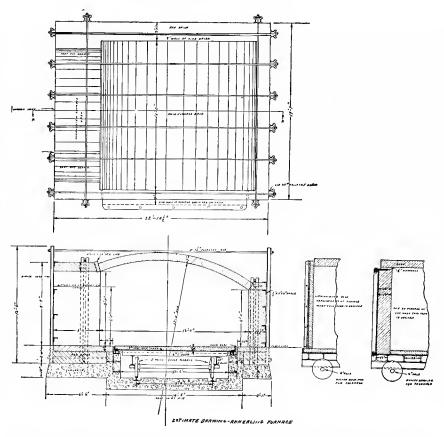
Car annealing furnace, overhead oil-fired, operated with only one burner.
